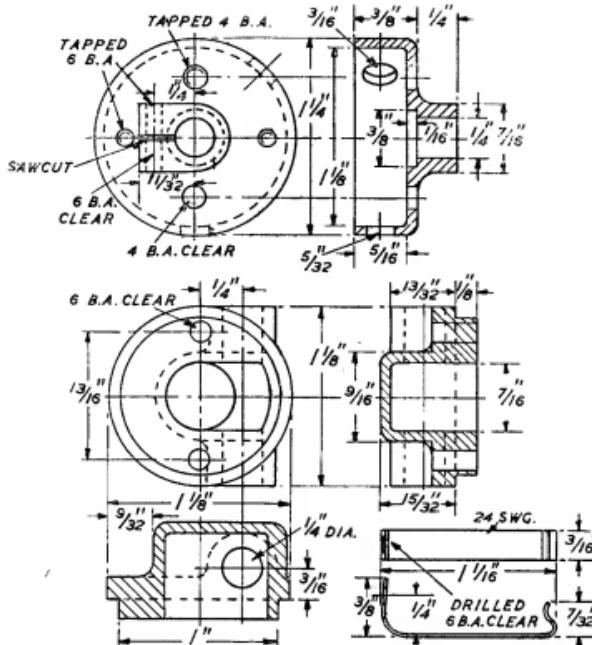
Spiral gear housing, modified contact-breaker casing, and spring clips for securing distributor
